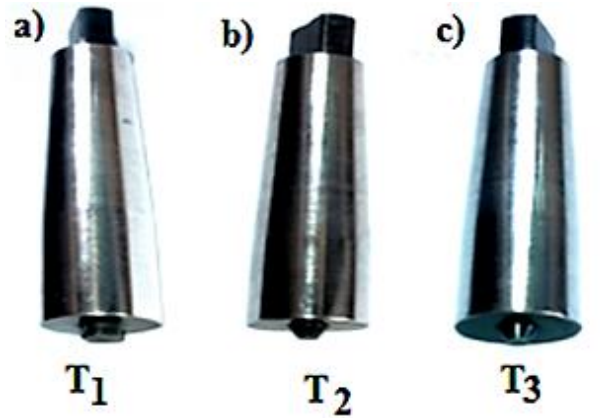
Tool pin geometries used for the welding process: (a) Straight threaded pin, (b) Threaded tapered pin, (c) Tapered Threadless pin
